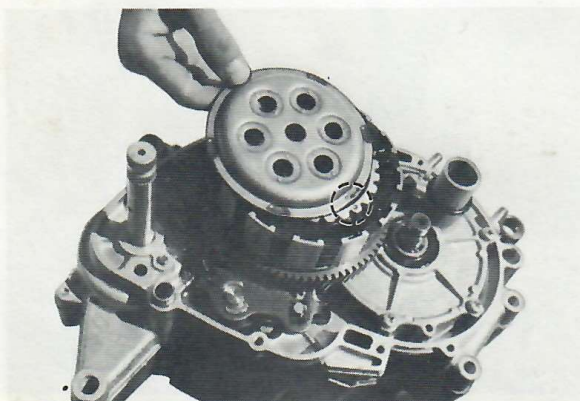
Alignment marks of clutch sleeve hub and clutch pressure plate
